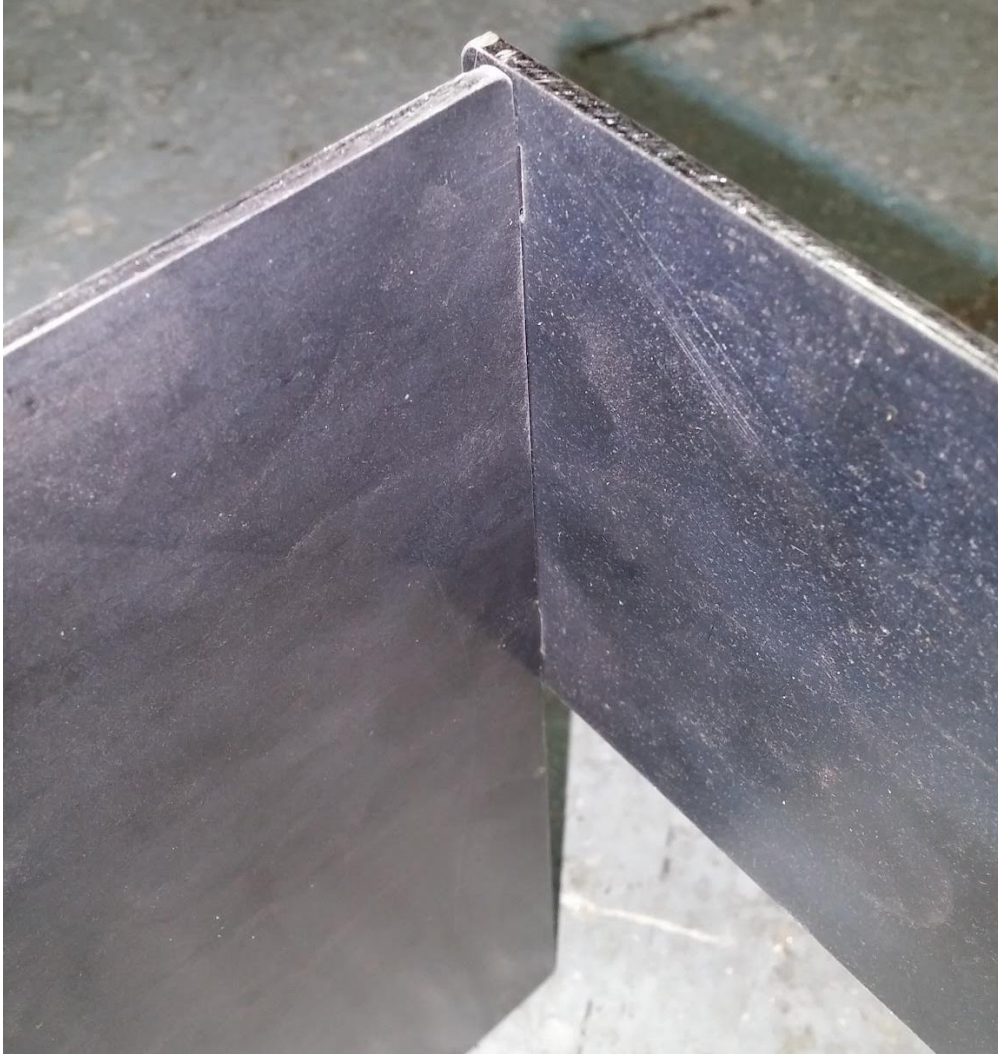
Fitting the two pieces of the mold together for welding.
